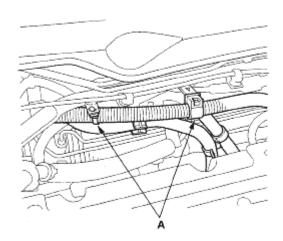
Installing Engine Wire Harness Clamp And Clip To Mounting Brackets Courtesy of AMERICAN HONDA MOTOR CO., INC.
